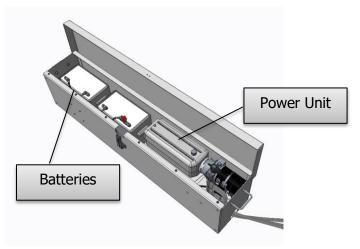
Hydraulic Power Unit (HPU300 shown)
